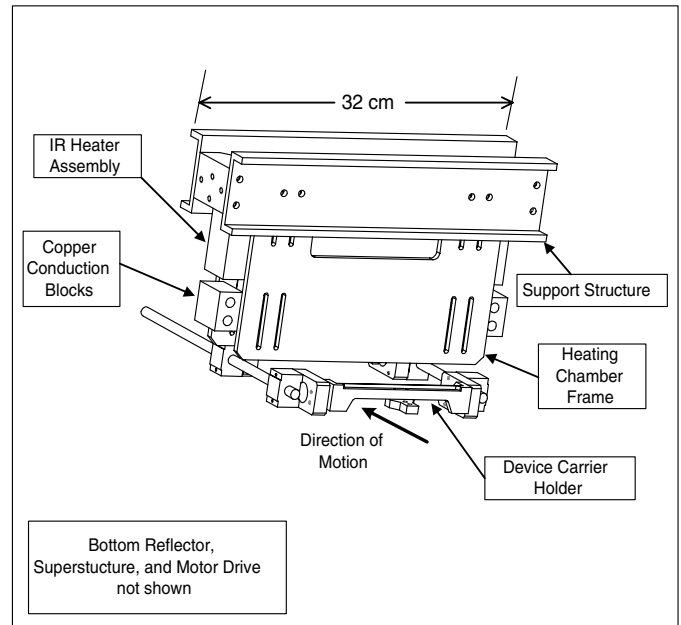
IR HEATING CHAMBER ASSEMBLY.
